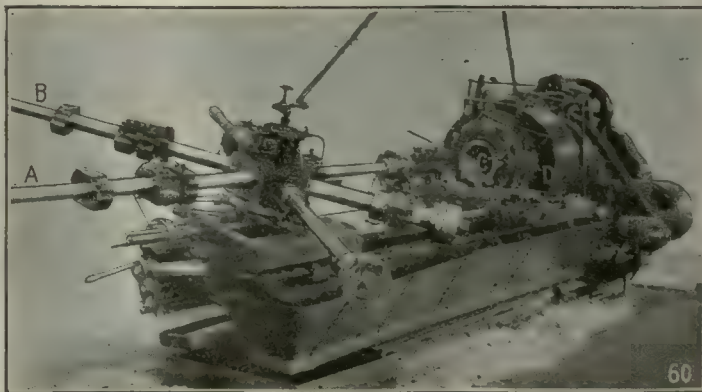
GISHOLT TURRET LATHE FOR FINISHING BORE OF LOCKING HOOP
